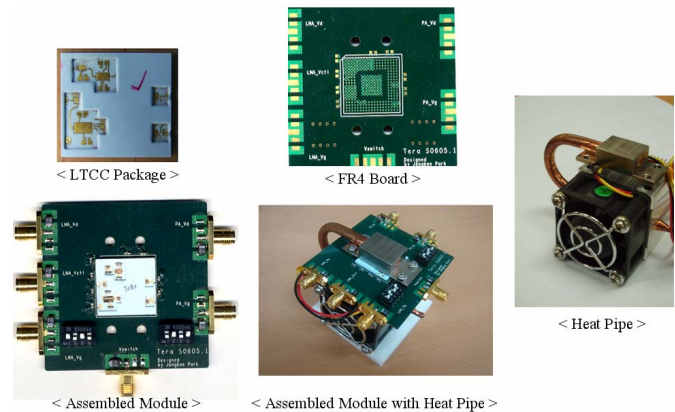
The fabricated LTCC package, FR4 board, assembled model, heat pipe, and assembled module with heat pipe.
